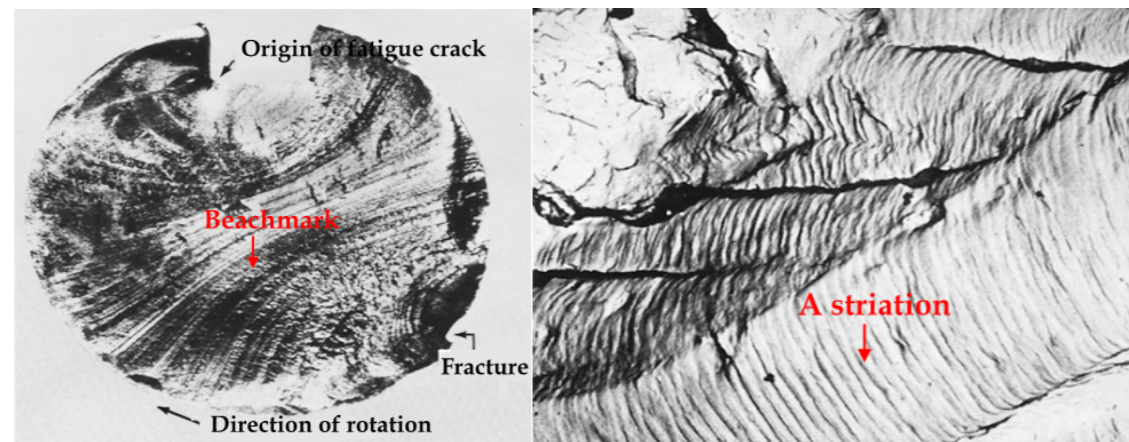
Fatigue fracture surface of a steel shaft.
